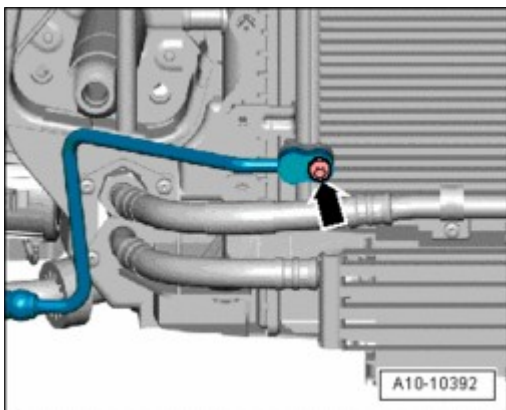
Removing Bolt And Disconnecting Refrigerant Line To A/C Evaporator
